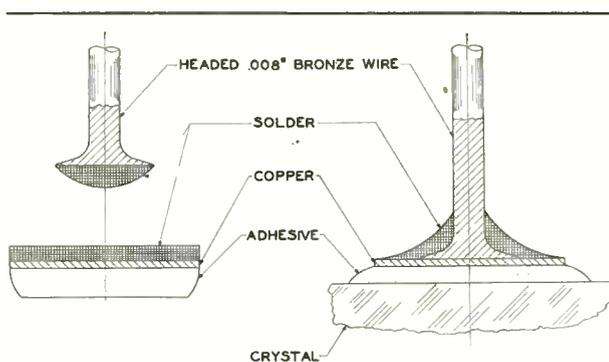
Left, below, combination adhesive disk before cementing to EDT plate. Left, above, headed wire that will be soldered to the disk's solder layer. Right, combination adhesive disk after cementing to EDT plate and after headed wire has been soldered to the solder layer. Note overlap of adhesive that furnishes proper surface for electrical continuity between mounting wire and gold electrode
